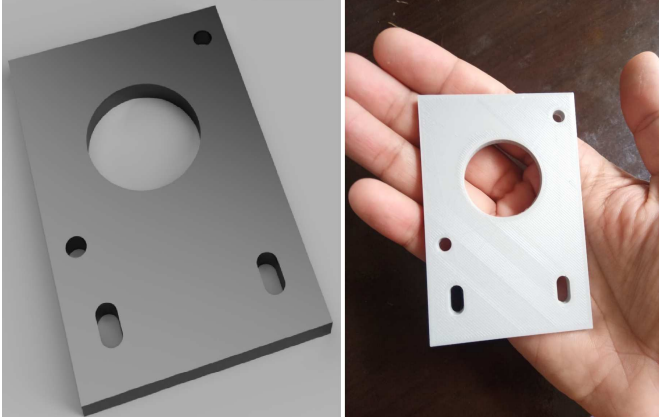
Left: 3D design of Motor X and Y Base/Right: 3D printed piece.
